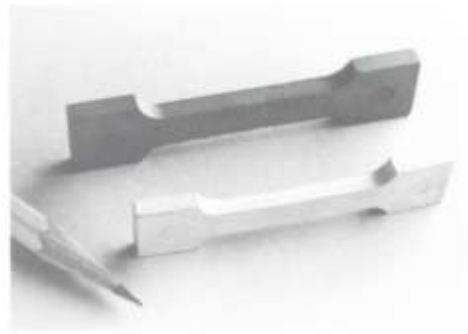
Injection-moulded medium carbon test bar - as moulded and as sintered. Example of shrinkage expected.
